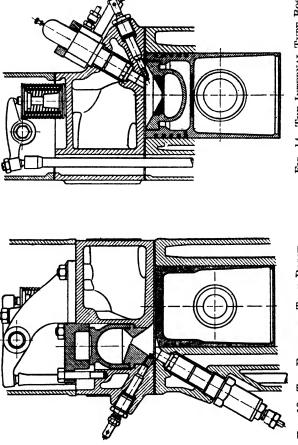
, THE INTERNAL TYPE BOSCH-ACRO PRE-COMBUSTION CHAMBER FIG. 13. THE EXTERNAL TYPE BOSCH-Acro Pre-combustion Chamber
